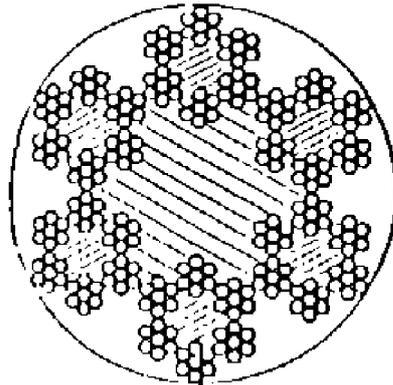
TILLER-ROPE CONSTRUCTION USED FOR HAND OPERATING ROPES NOT PERMITTED FOR SUSPENSION OR GOVERNOR ROPE EXCEPT FOR REPLACEMENT ON OLD ELEVATORS WITH GOVERNORS DESIGNED FOR IT THIS TYPE OF ROPE CONSTRUCTION IS ALSO PROHIBITED FOR USE TO CONNECT THE SAFETY TO THE GOVERNOR ROPE (RULE 205 12)
